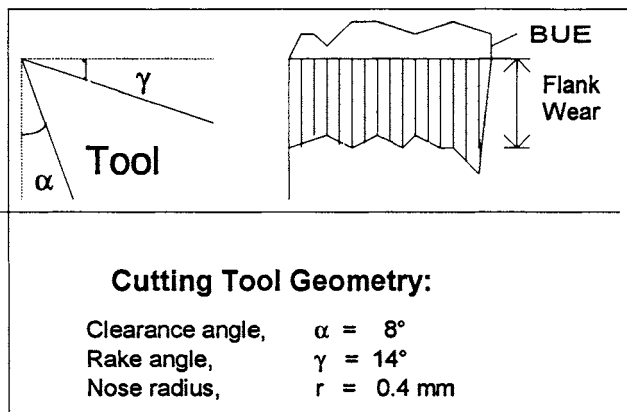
Tool geometry and wear measurement on the flank. BUE = built-up edge.
